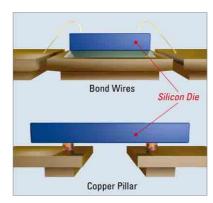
By using copper pillars, a larger die can fit in a device package compared to a traditional approach that uses wire bonding techniques.
